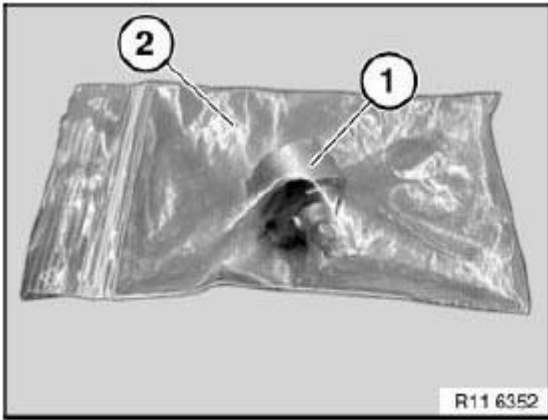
Identifying Magnet Wheel In Plastic Bag
